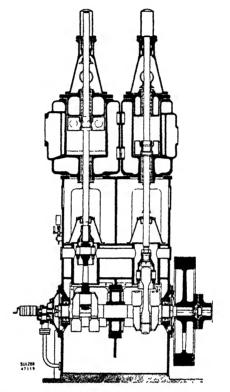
Sectional drawing, longitudinal through an oil-free oxygen compressor dealing with 840 cu. ft. per min. at 85 lb. per sq. in.
